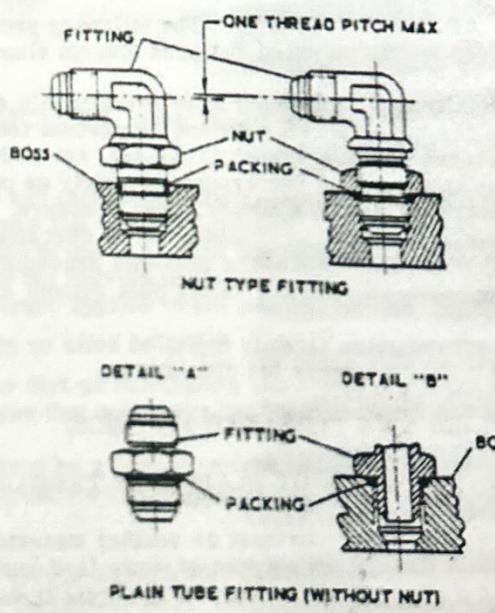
Straight Thread Tube Connectors with O-ring Packing
